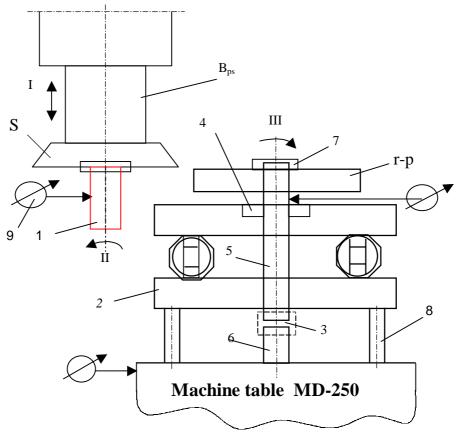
Set-up for loading conditions rigidity evaluation of the toothed-wheels machine MD-250: I-the mortising movement; II and III- the tool holder movement  $B_{ps}$ , respectively of the machine table; S-knife disk; r-p –disk part;1-special chuck; 2-dynamometric table; 3 –coupling; 4- guiding element;5-6 special chucks; 7-positioning-holding element; 8- distance piece; 9-measurement device with inductive transducers
